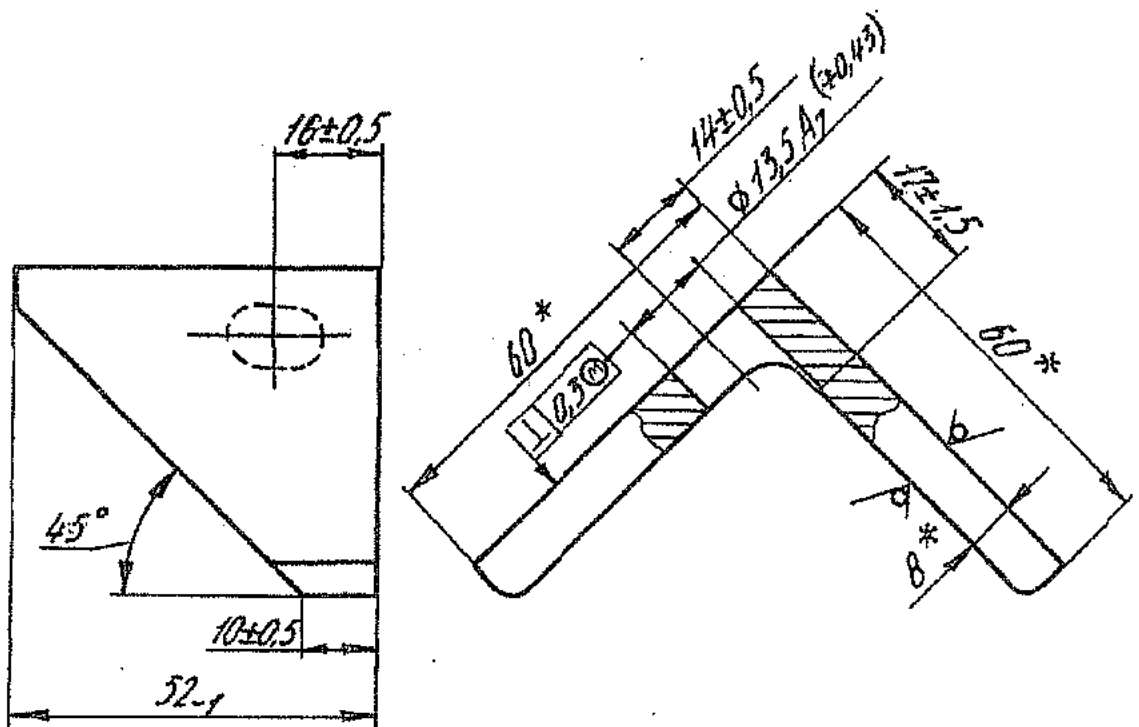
FIG: ANGLE PIECE TO DRG. NO 172.33.736
